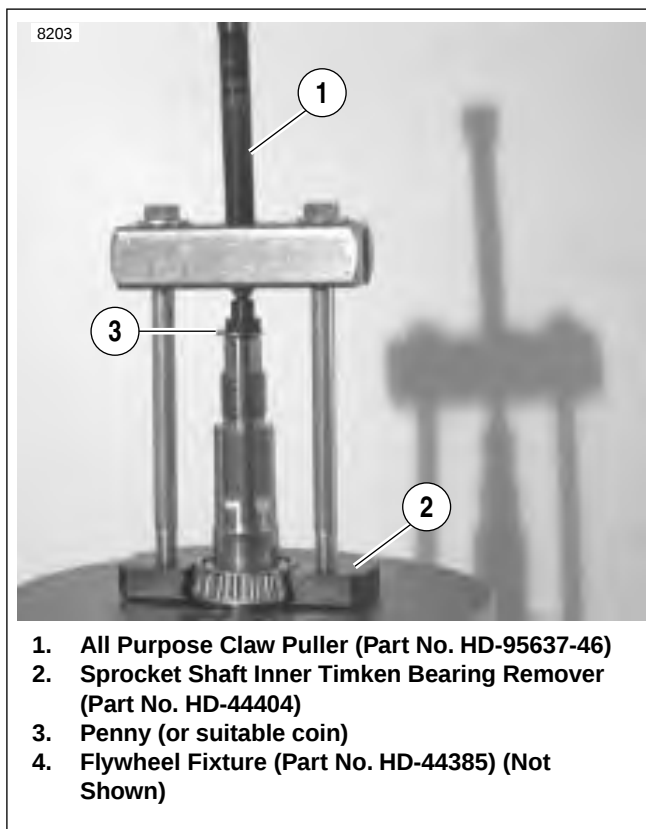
Removing Sprocket Shaft Inner Timken Bearing (Typical)
